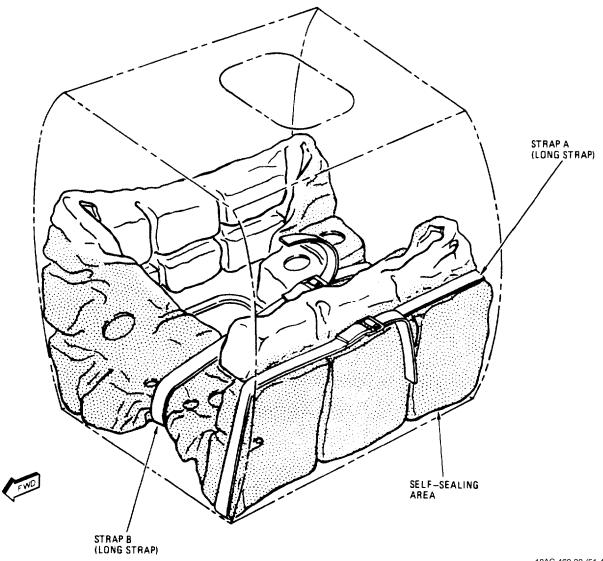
Removal - No. 2 Fuel Tank Folding (Sheet 4)
